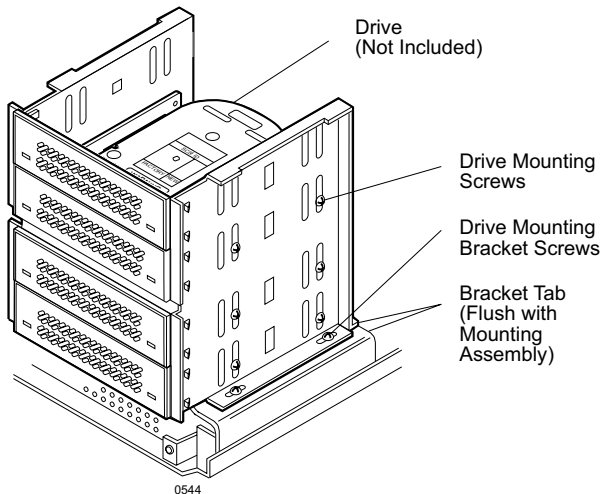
Installing the Drive into the DS100 4-Bay Drive Mounting Bracket
